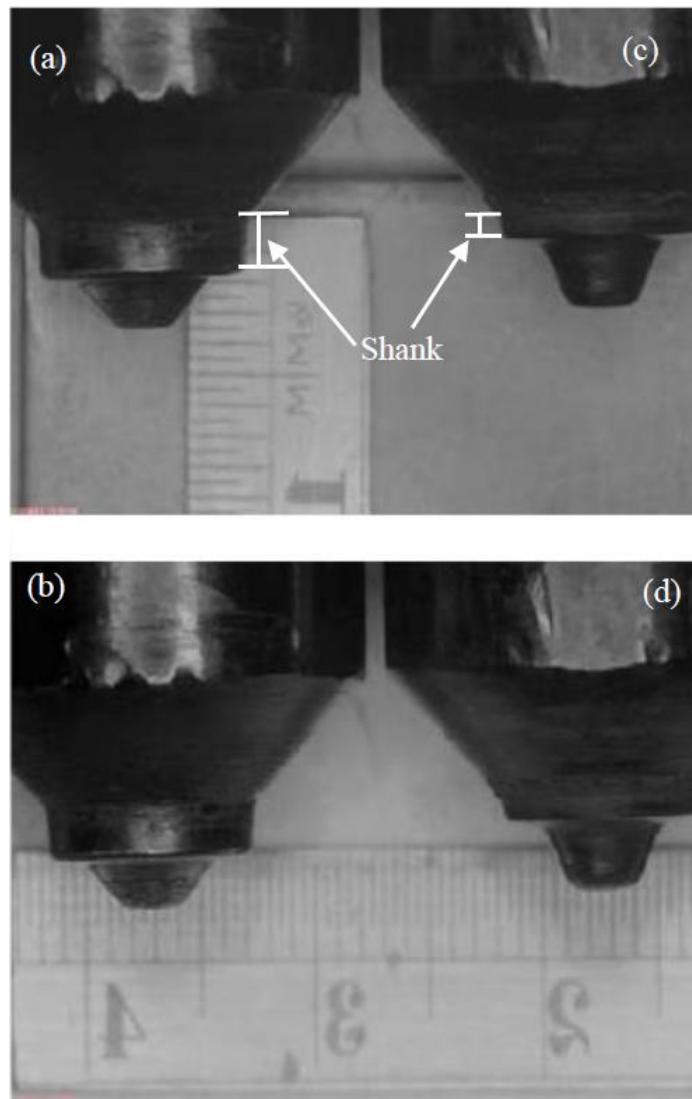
(a) and (b) initial shape of the tool (c) and (d) worn tool
